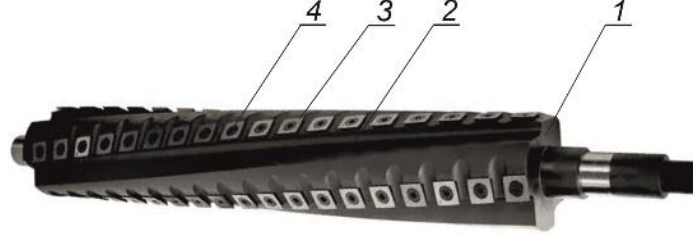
Construction of the cutter shaft of a planer machine with cutting inserts arranged in a spiral: 1 – shaft housing; 2 – spiral projection; 3 – cutting insert; 4 – screw for securing the insert.
